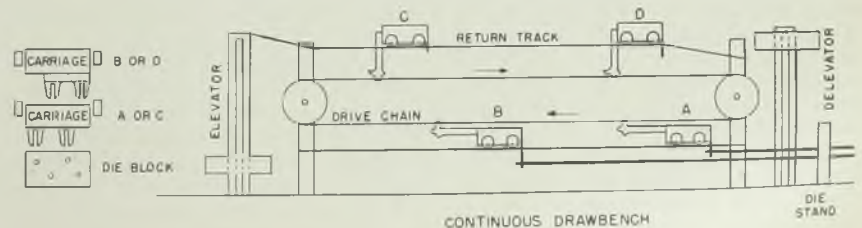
Recently developed continuous drawbench equipped with a 4-hole die. Each carriage draws two pieces at one draw
